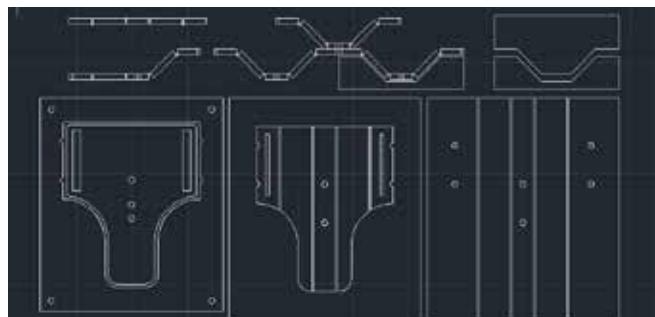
Muqarna press mould CAD drawing, © 2014, Hursty. This design featured a broader spade-like design that allows for compression into an angled base mold.
